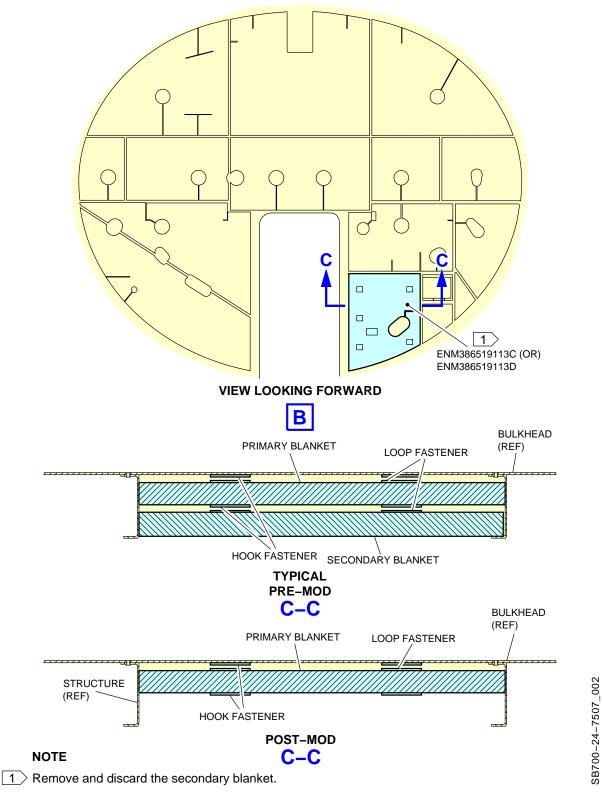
Removal and discard of the insulation blanket. (Sheet 2 of 2)
